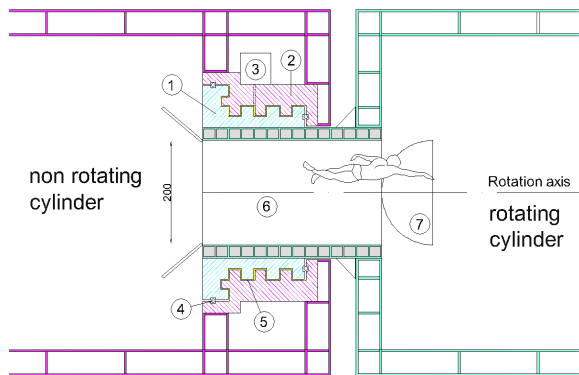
The roto-joint: (1) rotor, (2) stator, (3) auxiliary ferrofluid tank, (4) ball bearings, (5) seal gap filled with ferrofluid, (6) air lock, (7) fire door
